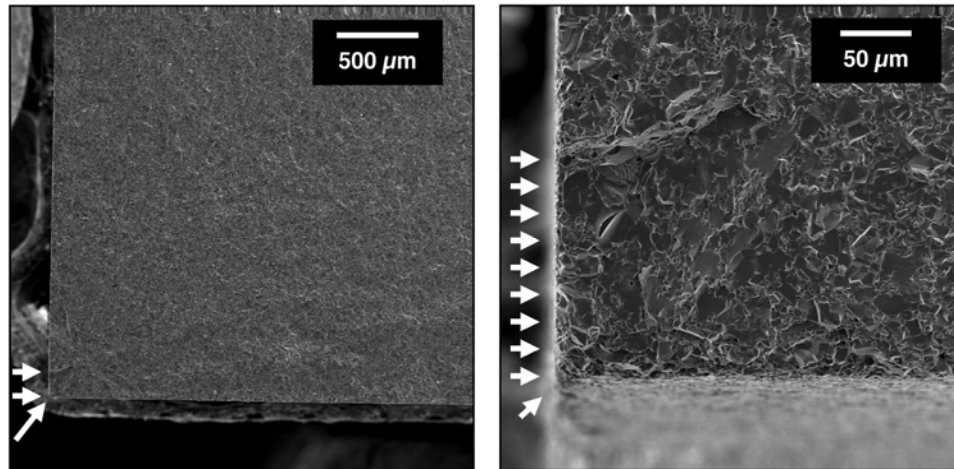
Fracture surface of an As-Received, CoorsTek ground, unchamfered, ASTM C1161 type “B” specimen showing (left) failure at the corner and (right) higher magnification image of the location containing the strength-limiting flaw.
